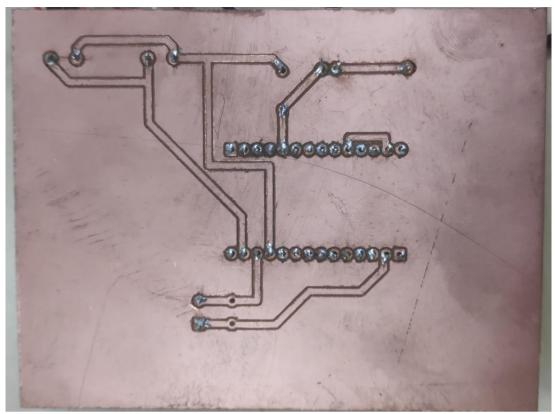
The CNC Milled Daughter Node Copper-Clad Board
